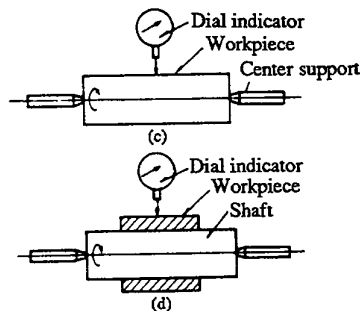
Roundness measurement using the radius method (Workpiece with center holes)
